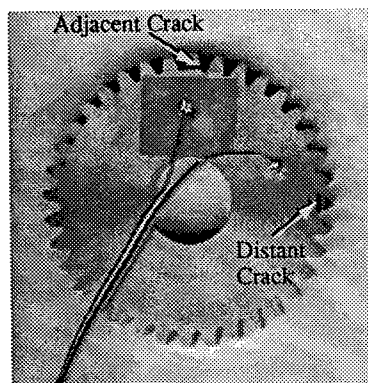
Detection of bending fatigue cracks and abrasive wear in high-precision gears was investigated.
